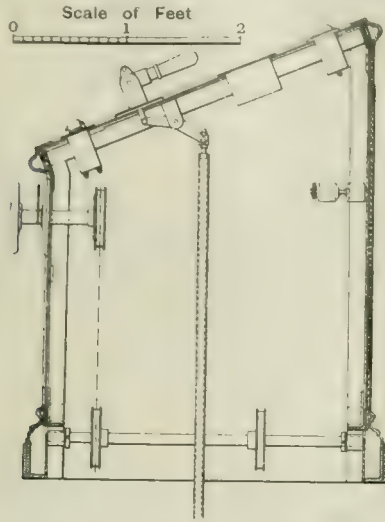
END VIEW OF GENERATOR CONTROL DESK SHOWING CHAIN GEAR FOR OPERATING RHEOSTATS
